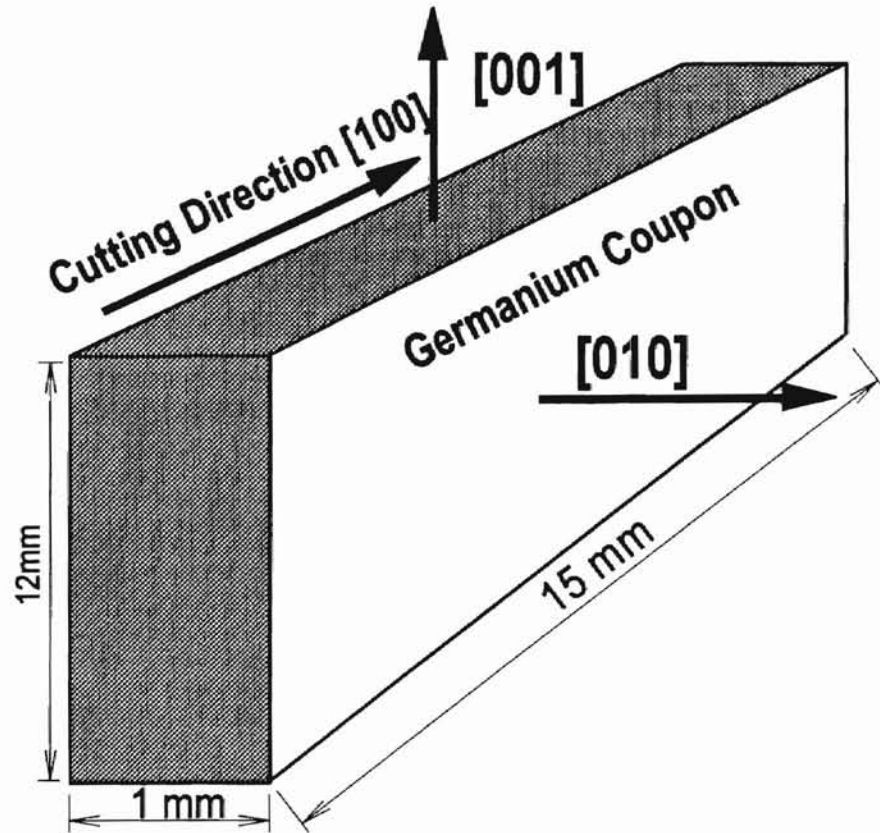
Shown here is a schematic detailing the workpiece dimensions and orientation
